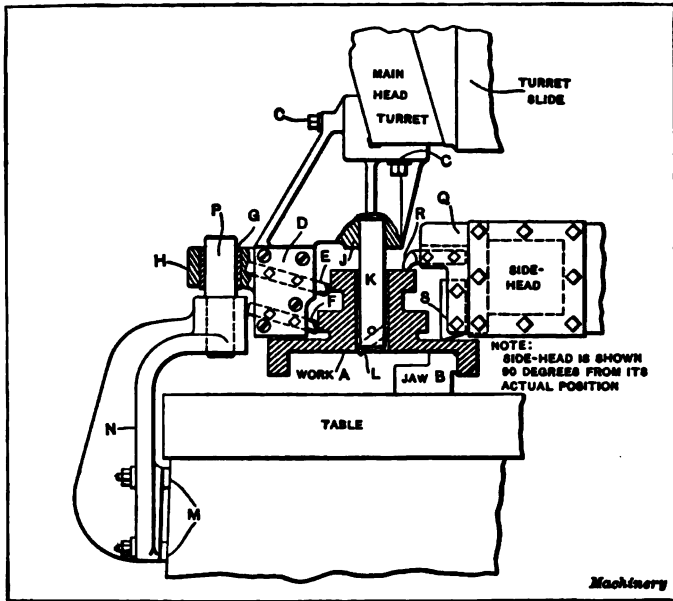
Piloted Multiple Turning Tool for Triple Gear Blank
